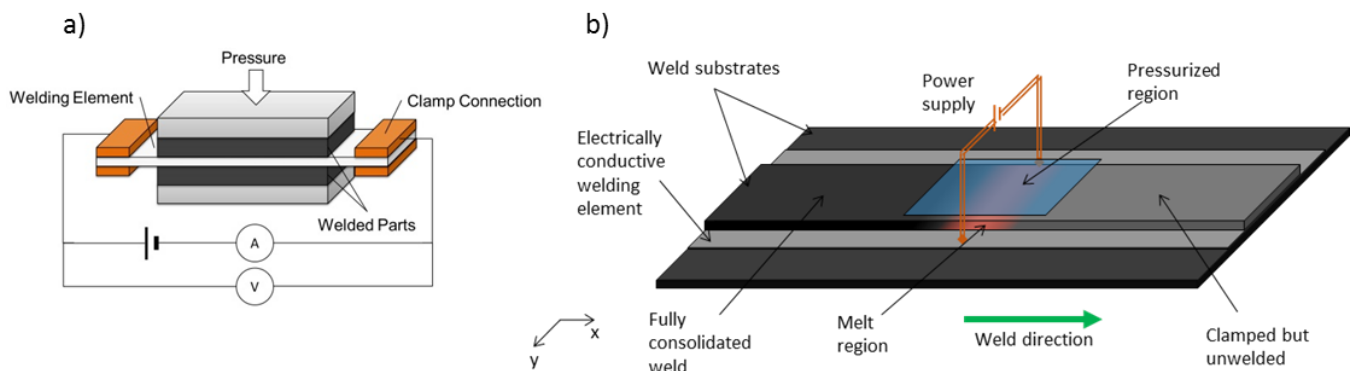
Schematic representation of a) static resistance welding (adapted from [4]) and b) continuous resistance welding setup.
